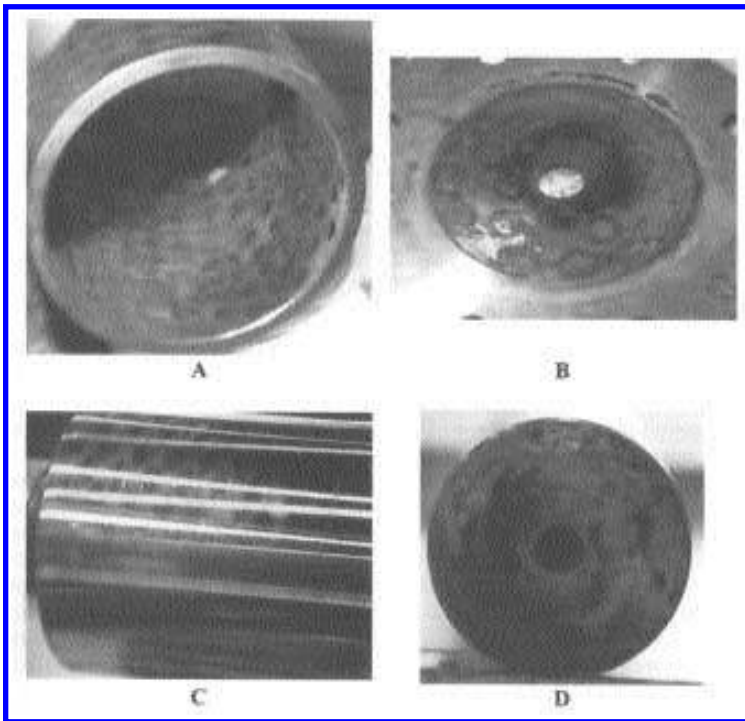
Used components of the teeter bearing system. “A” shows a worn bushing. “B” shows a worn thrust bearing. “C” shows a worn shaft. “D” as worn shaft thrust face
